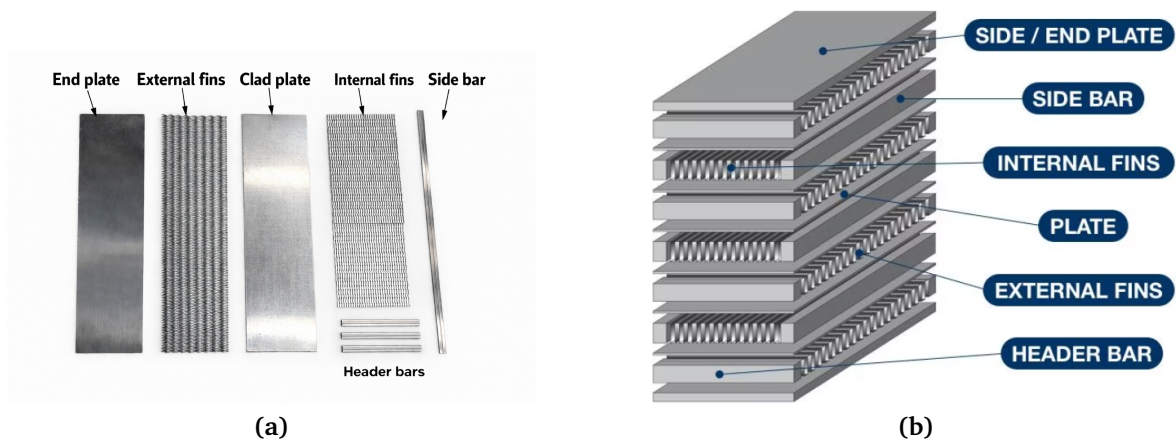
Plate–fin heat exchanger (PFHE) structure: (a) PFHE core components prior to assembly (photograph courtesy of VEMA Industries S.r.l.); (b) assembled PFHE core.
